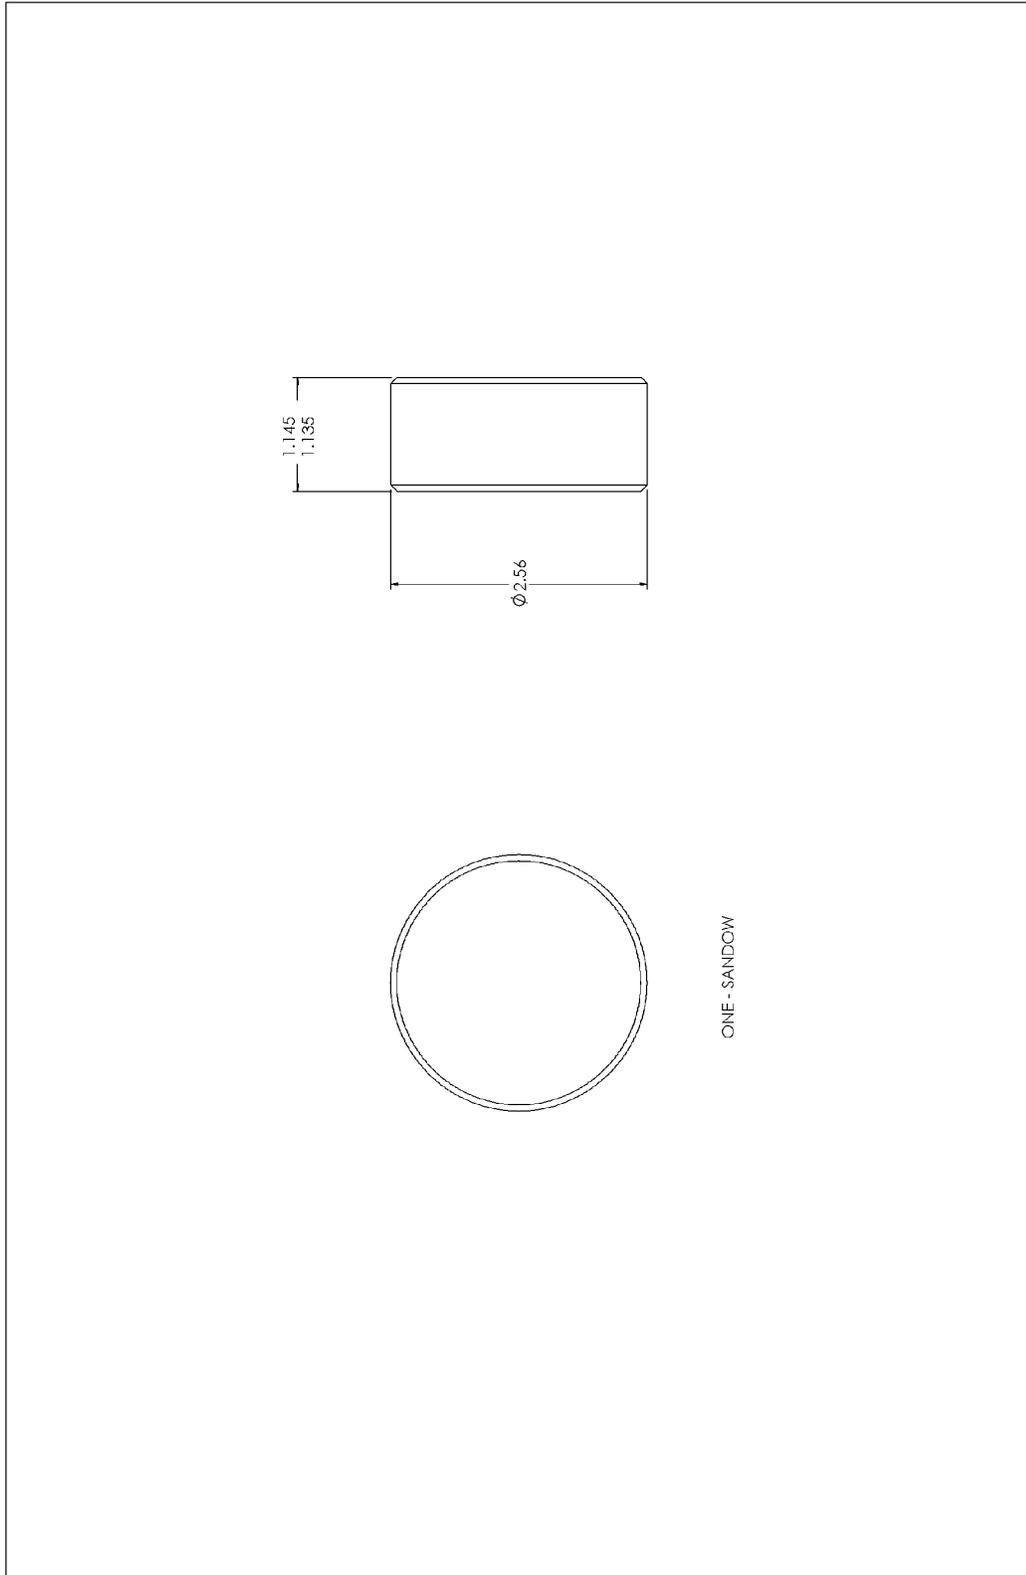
Assembly Tools - Spacer - Brake Disc Installation
